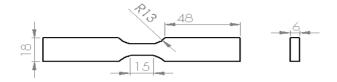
Fatigue test specimen geometric dimensions in millimeters
